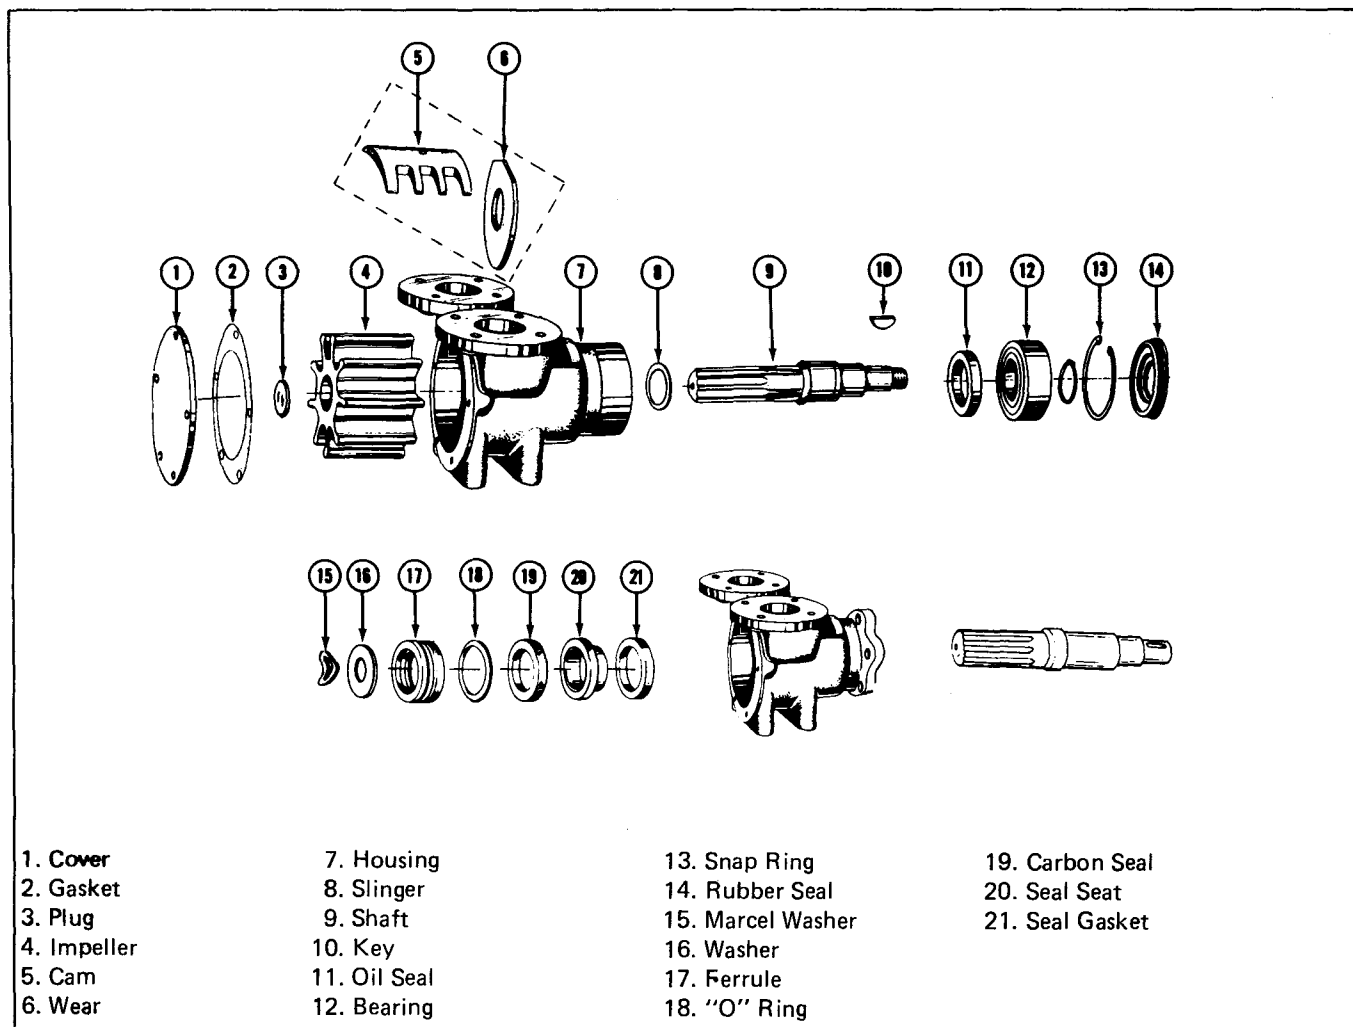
, (N10806). Raw (sea) water pump – exploded view
